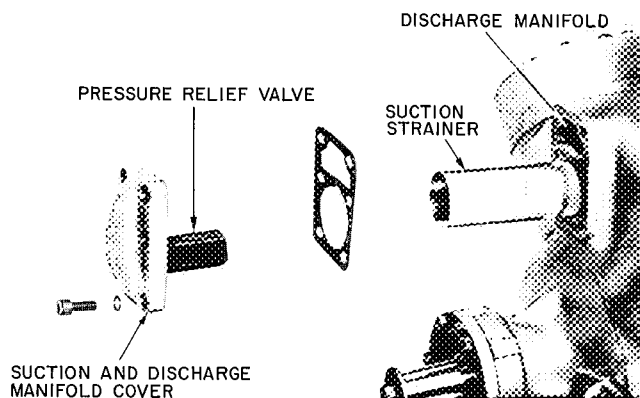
Pressure Relief Valve and Suction Strainer (5H40,46,80,86)
